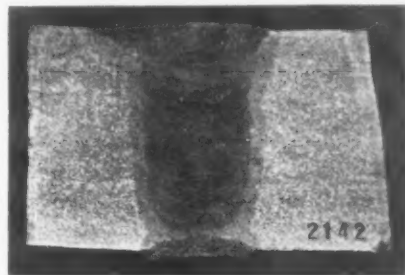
This shows the method of building up the welds used for the Bayonne unit tanks. The plate edges are machined to form before the welding is started.
